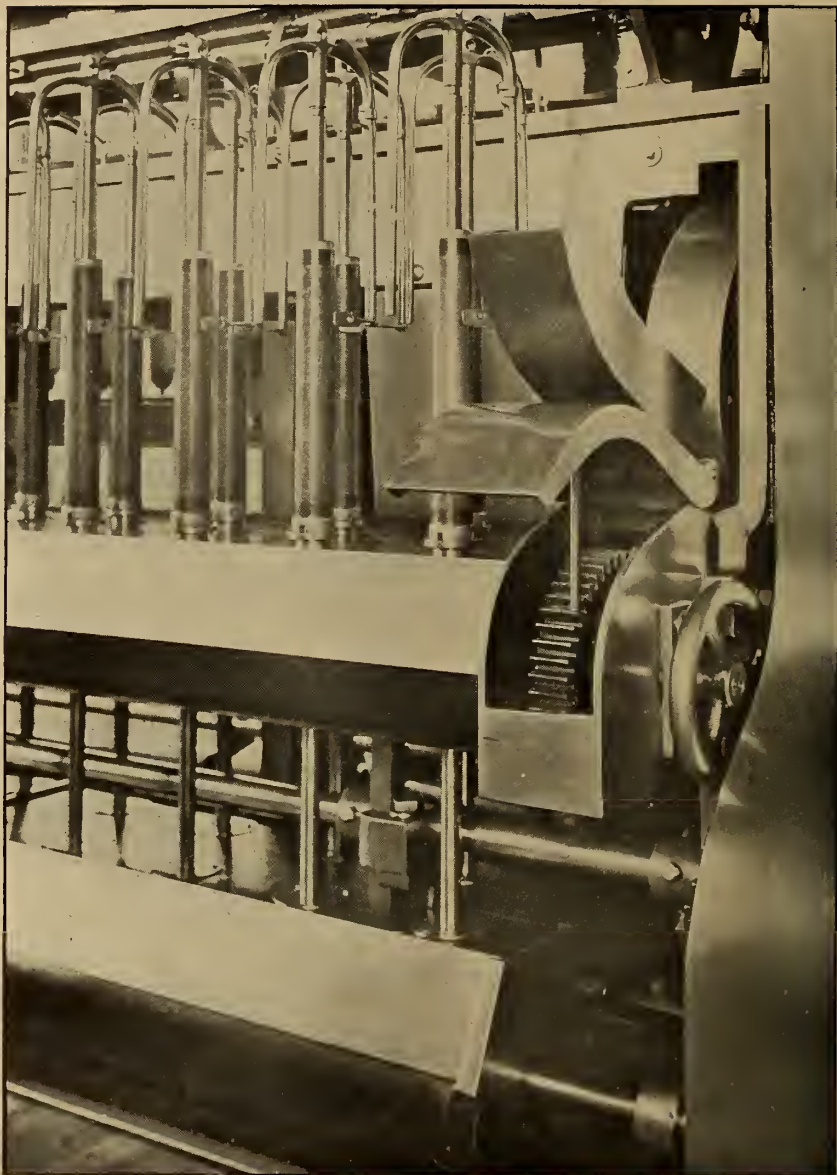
GUARDS OVER BOBBIN AND SPINDLE WHEELS OF SPEED FRAME
